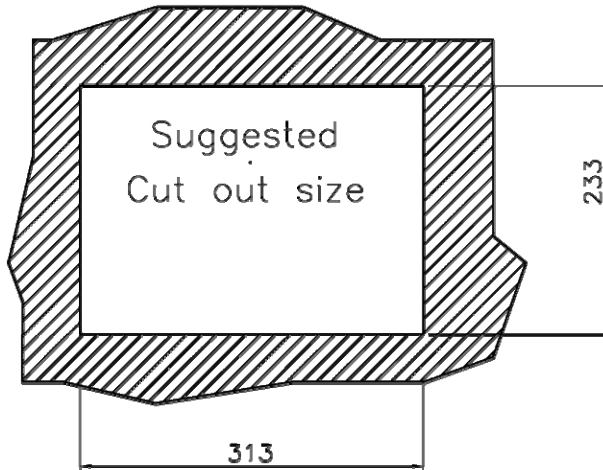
PPC-3712A-N26 Panel Cutout Dimensions
